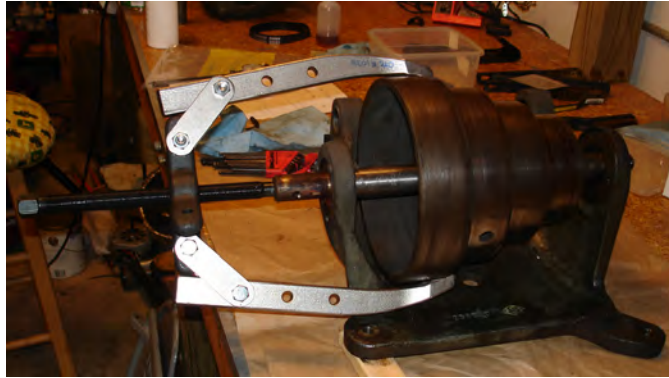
Pulling the shaft through the underdrive pulley. This is being done so that there is enough room to remove the entire pulley from the casting.
